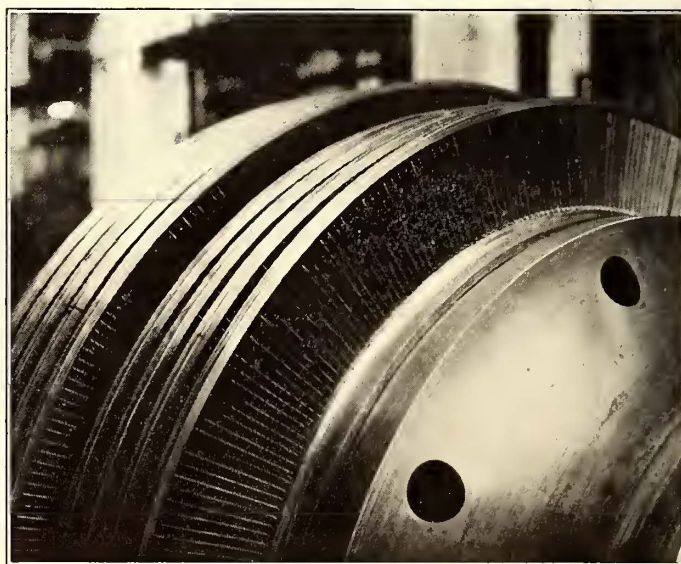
VIEW OF TURBINE BLADES, SHOWING SHROUDING
